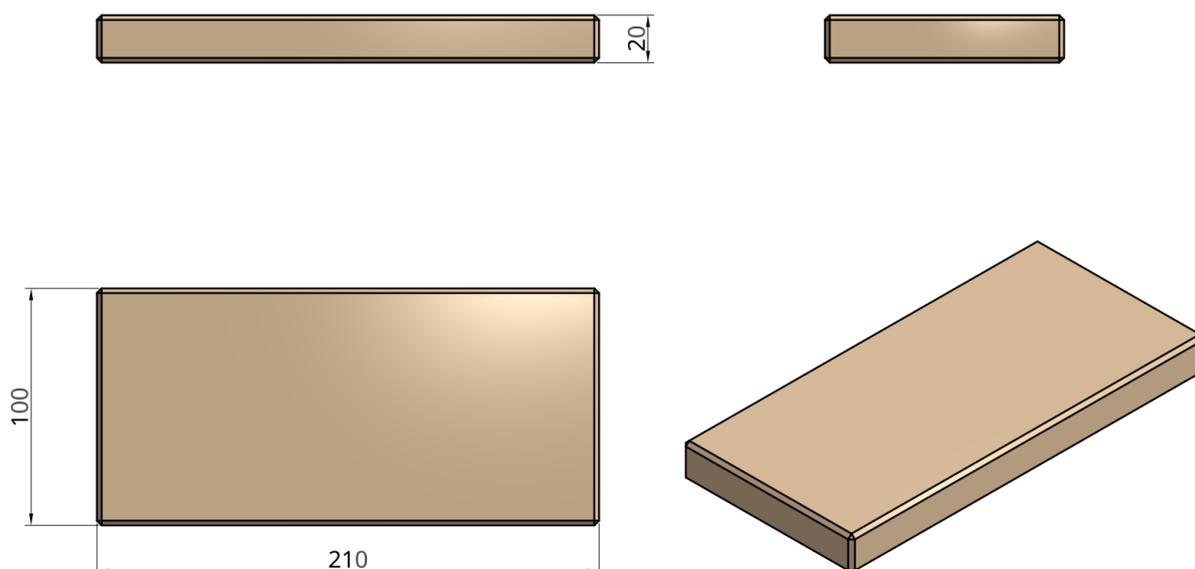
Top plate of the clamping block used to re-glue the syringes.
